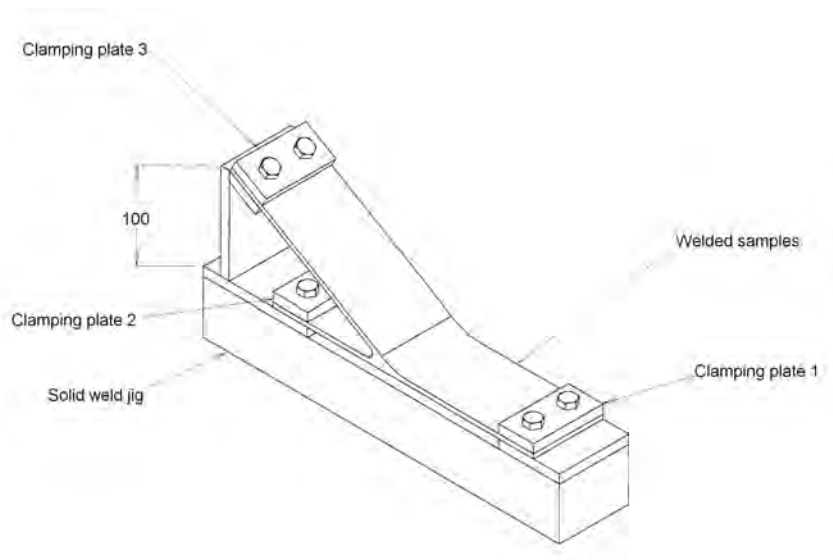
The weld jig used to manufacture welded samples.
